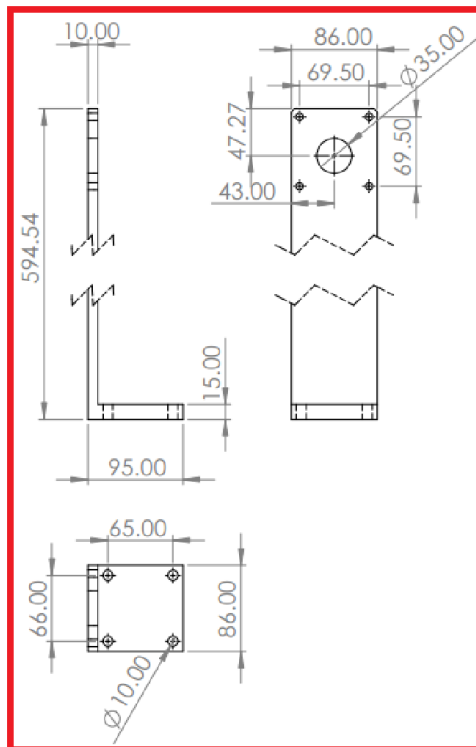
Tire Carrier Locator Geometry and Dimensions (mm)
